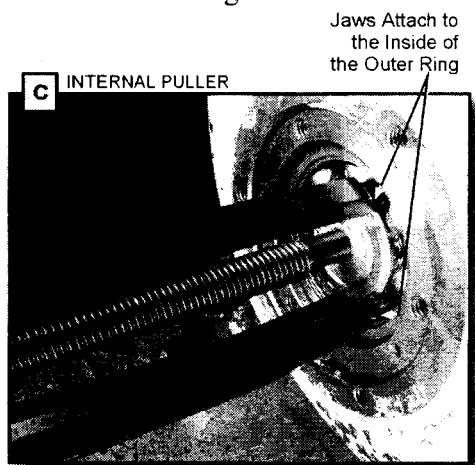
Internal four-jaw puller. (Courtesy SKF Canada Limited)
